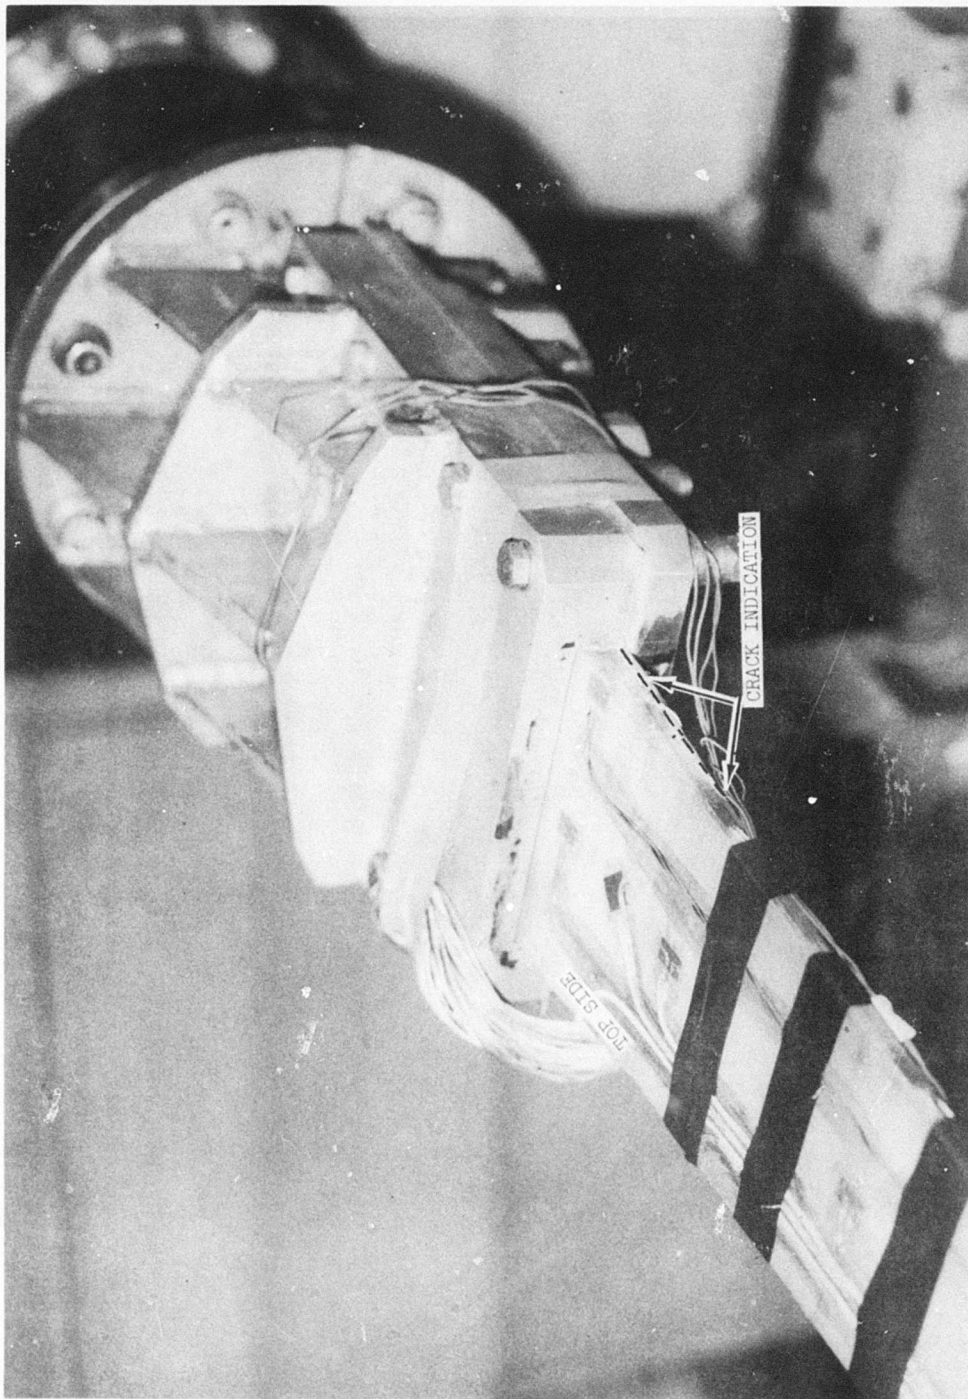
Fatigue Test Specimen Depicting Crack Indication.
